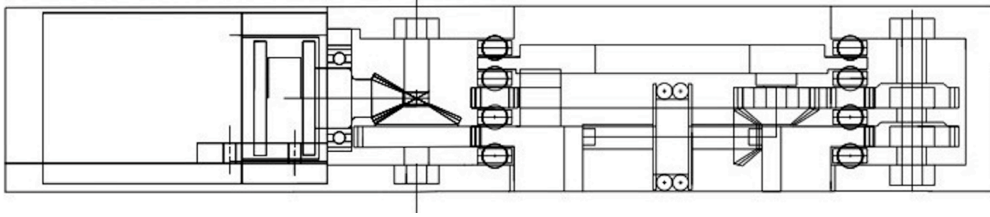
Section of RA2 showing the gear transmission to the lower friction wheel.
